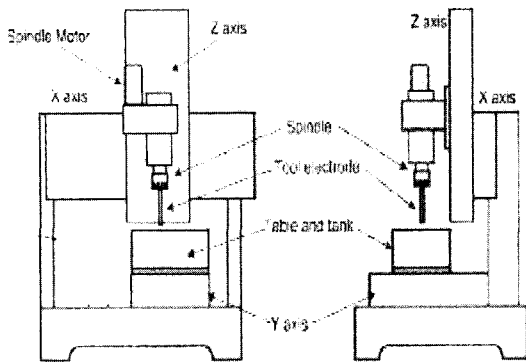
Block diagram of the multi-purpose miniature machine tool used for micro-EDM
